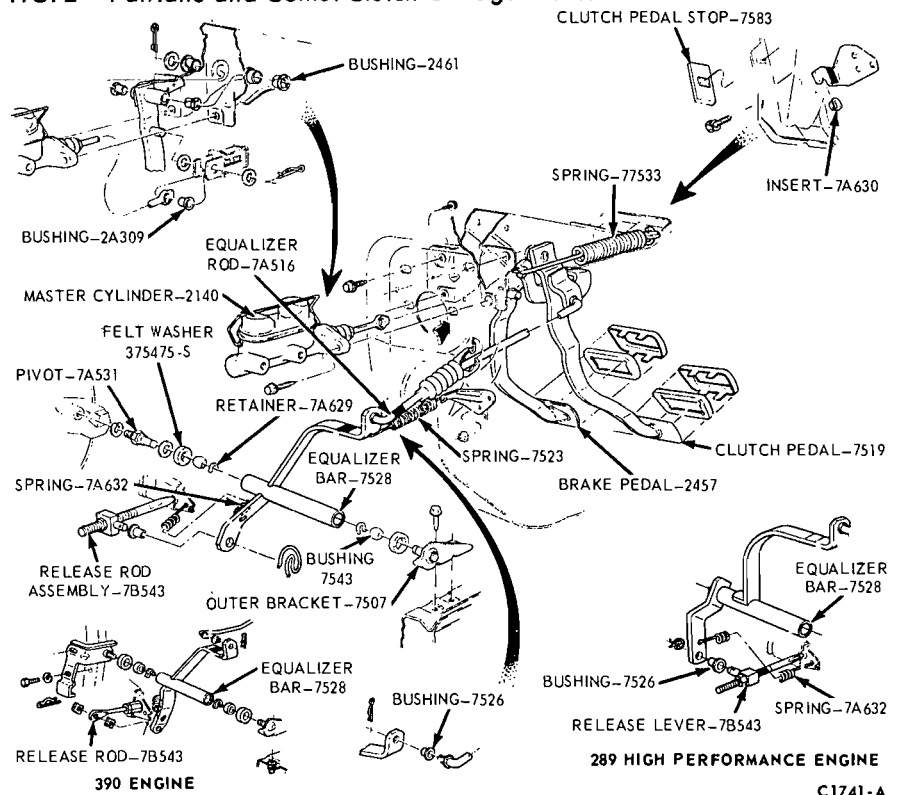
Mustang and Cougar Clutch Linkage Disassembled
